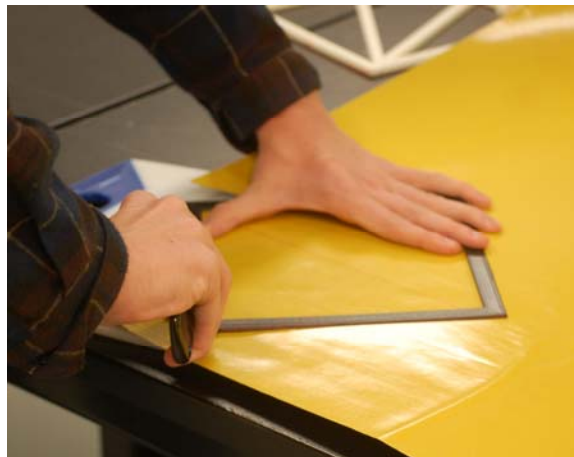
Cutting Material Squares Using 3-D Printed Guide
